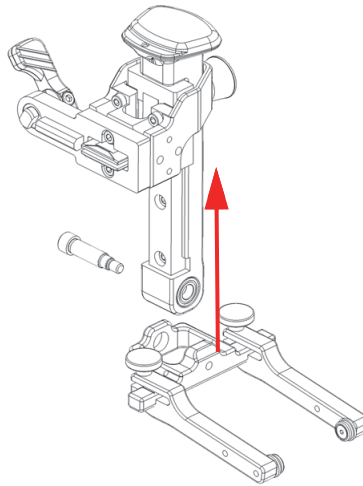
Sliding the SLA rail out the yoke pivoting beam
